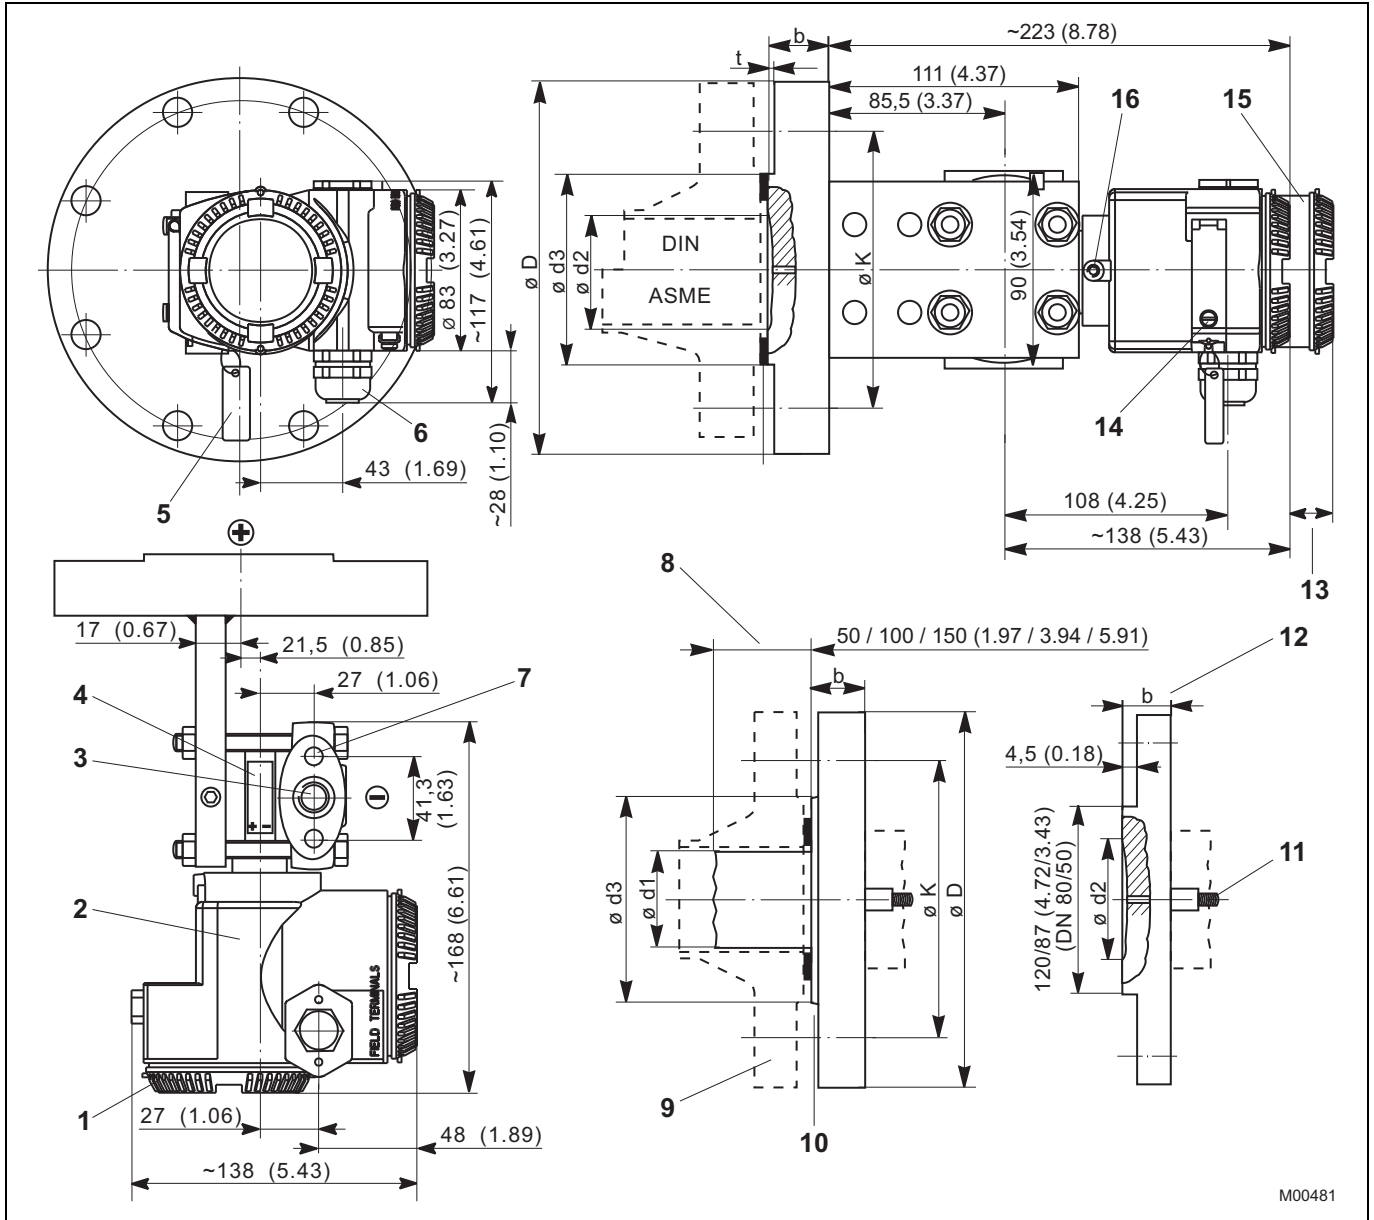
Dimensions in mm (inch), deviations in the drawing are possible
